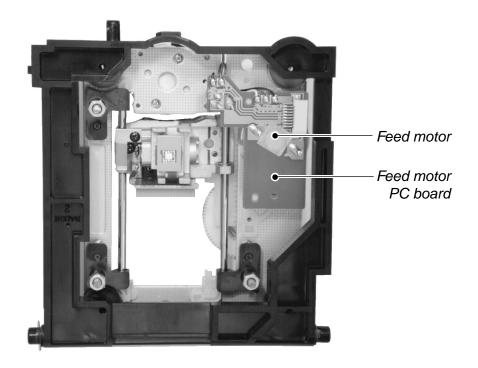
Pickup mechanism chassis assembly (Bottom side)
